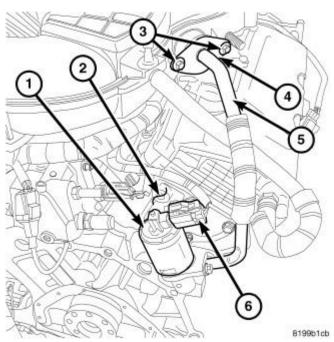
EGR Valve, Right Cylinder Head, Flange Mounting Bolts, Exhaust Gas Routing Tube & Electrical Connector
